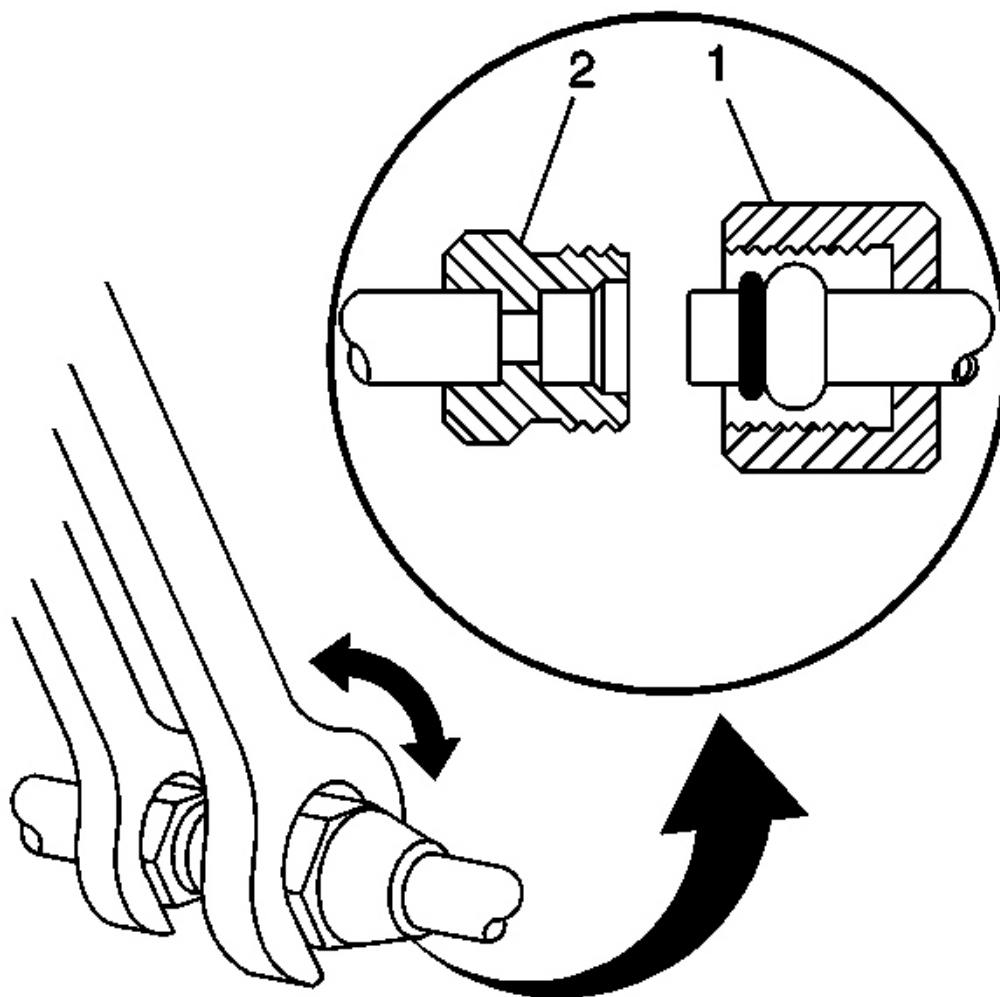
Condenser Fitting & Compressor Hose Fitting
